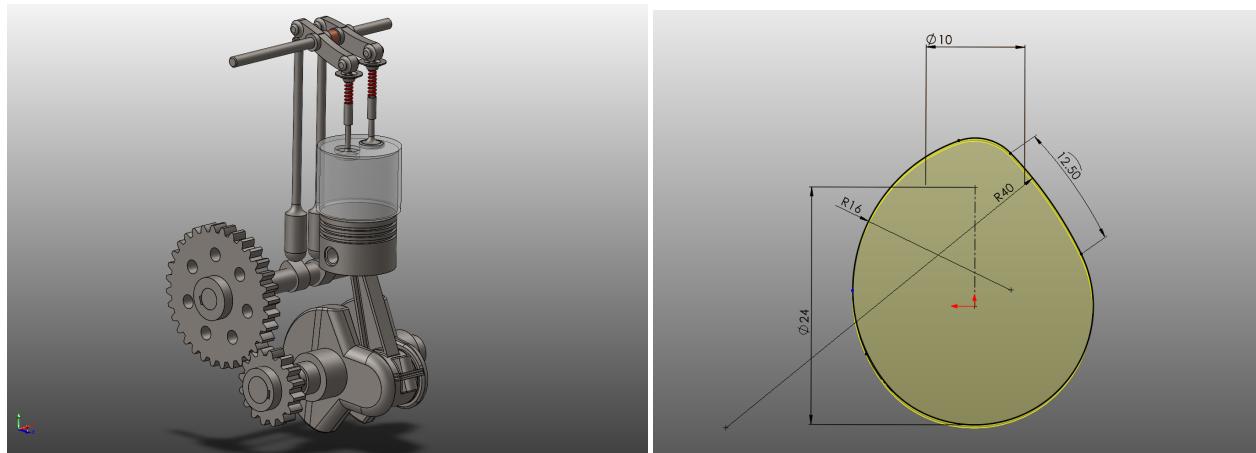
CAD assembly of the engine system and cam geometry used for the multibody analysis.
